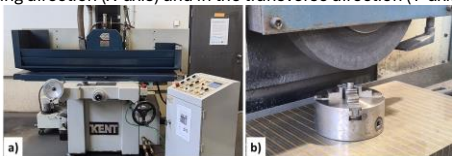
Experimental setup a) grinding machine, b) test sample support
